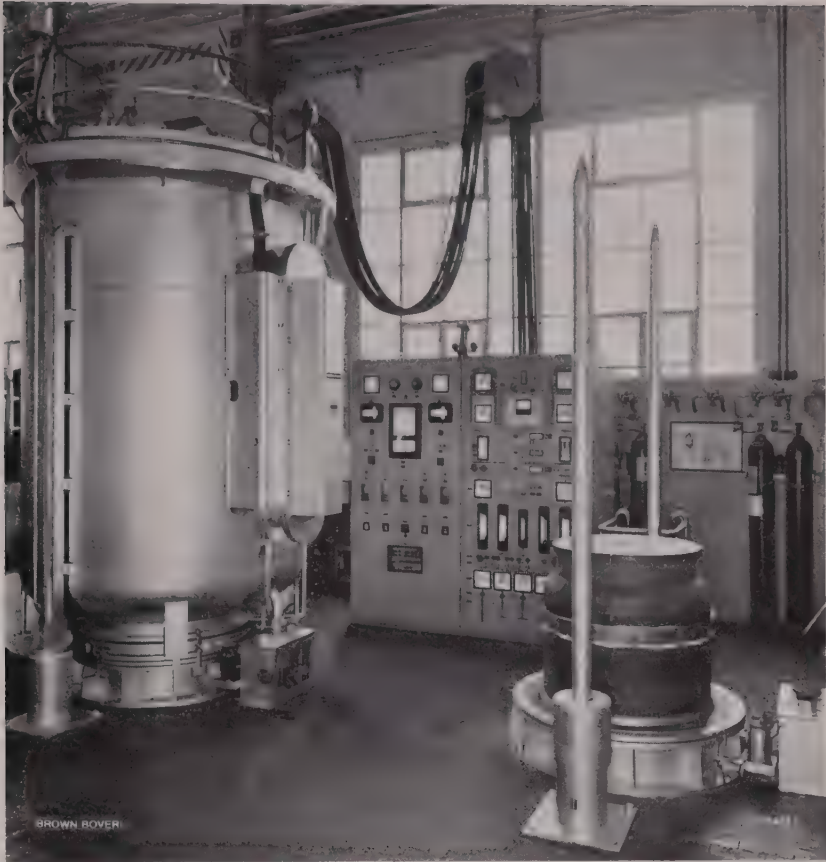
Vacuum furnaces used for degassing metal parts in a controlled atmosphere
